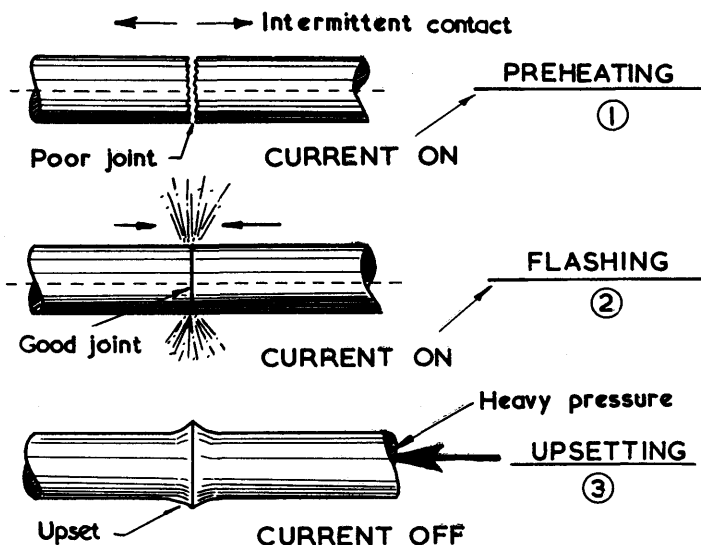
Stages in Flash-butt Welding.
